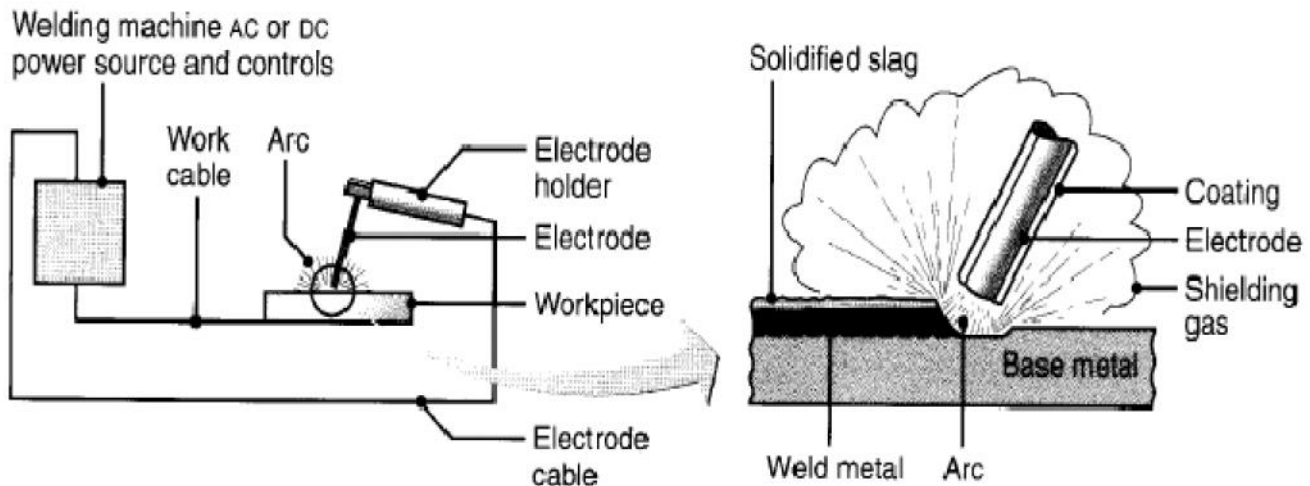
FIGURE Schematic illustration of the shielded metal-arc welding process. About 50% of all large-scale industrial-welding operations use this process.
